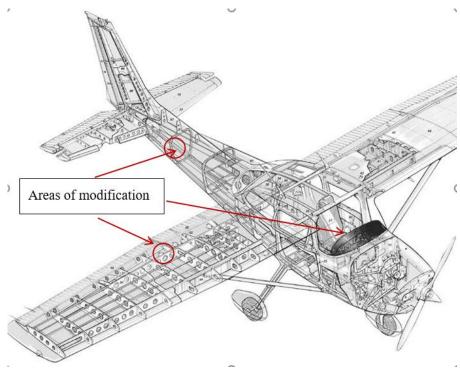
TYPICAL CESSNA 100 SERIES INSTALLATION
